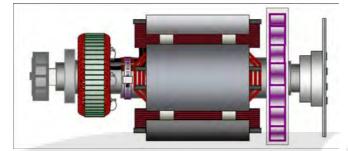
SINGLE BEARING ALTERNATOR ROTOR SHOWING COUPLING DISCS BOLTED TO DRIVE END COUPLING HUB (AT RIGHT)
